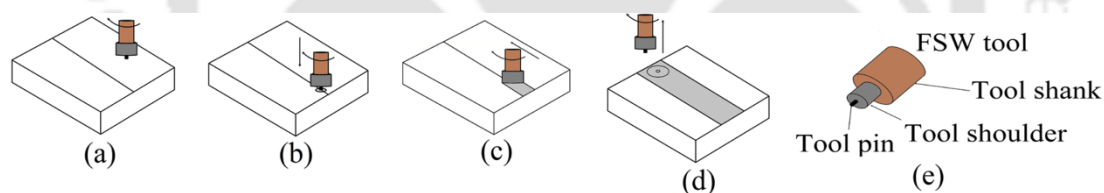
Steps involved in FSW process (a) positioning of plate (b) tool plunge (c) tool travel (d) tool retraction (e) FSW tool
